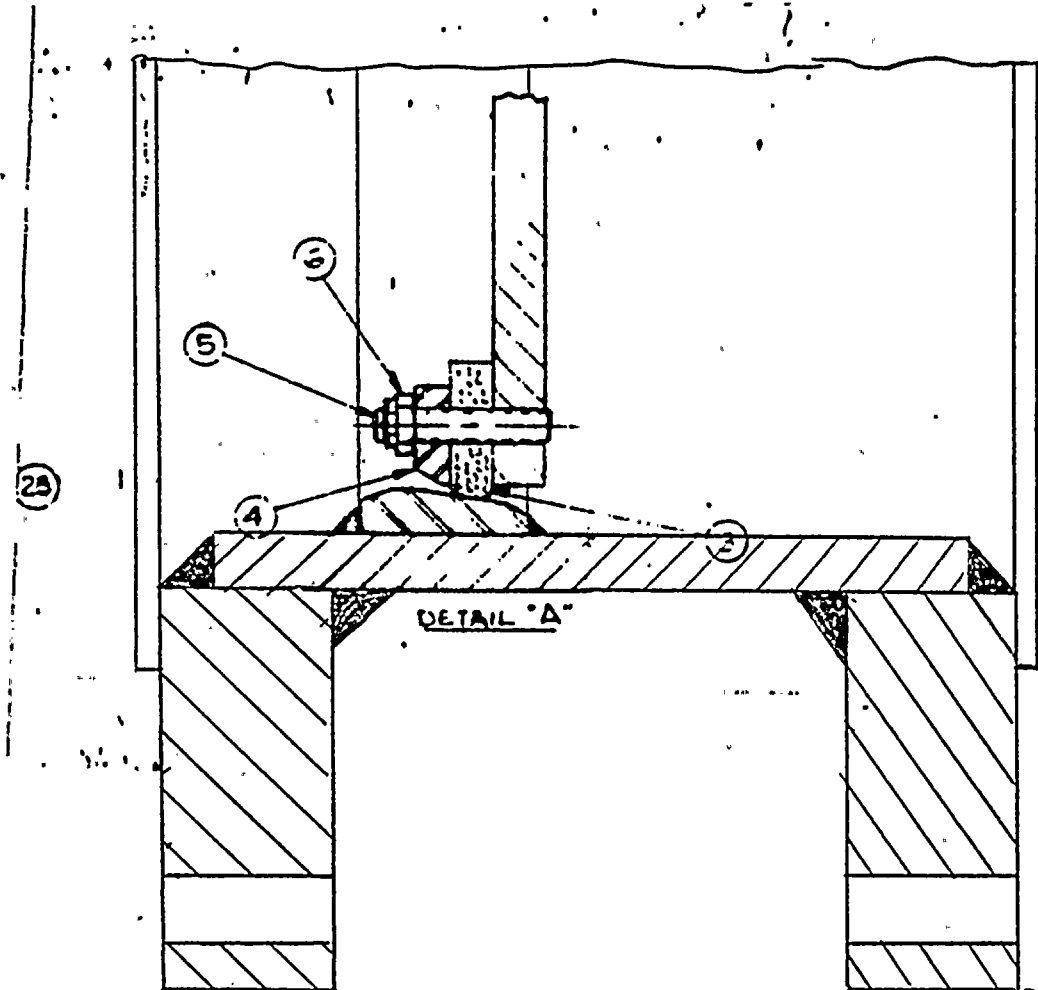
BIF DRAWING 206767, DETAIL A
